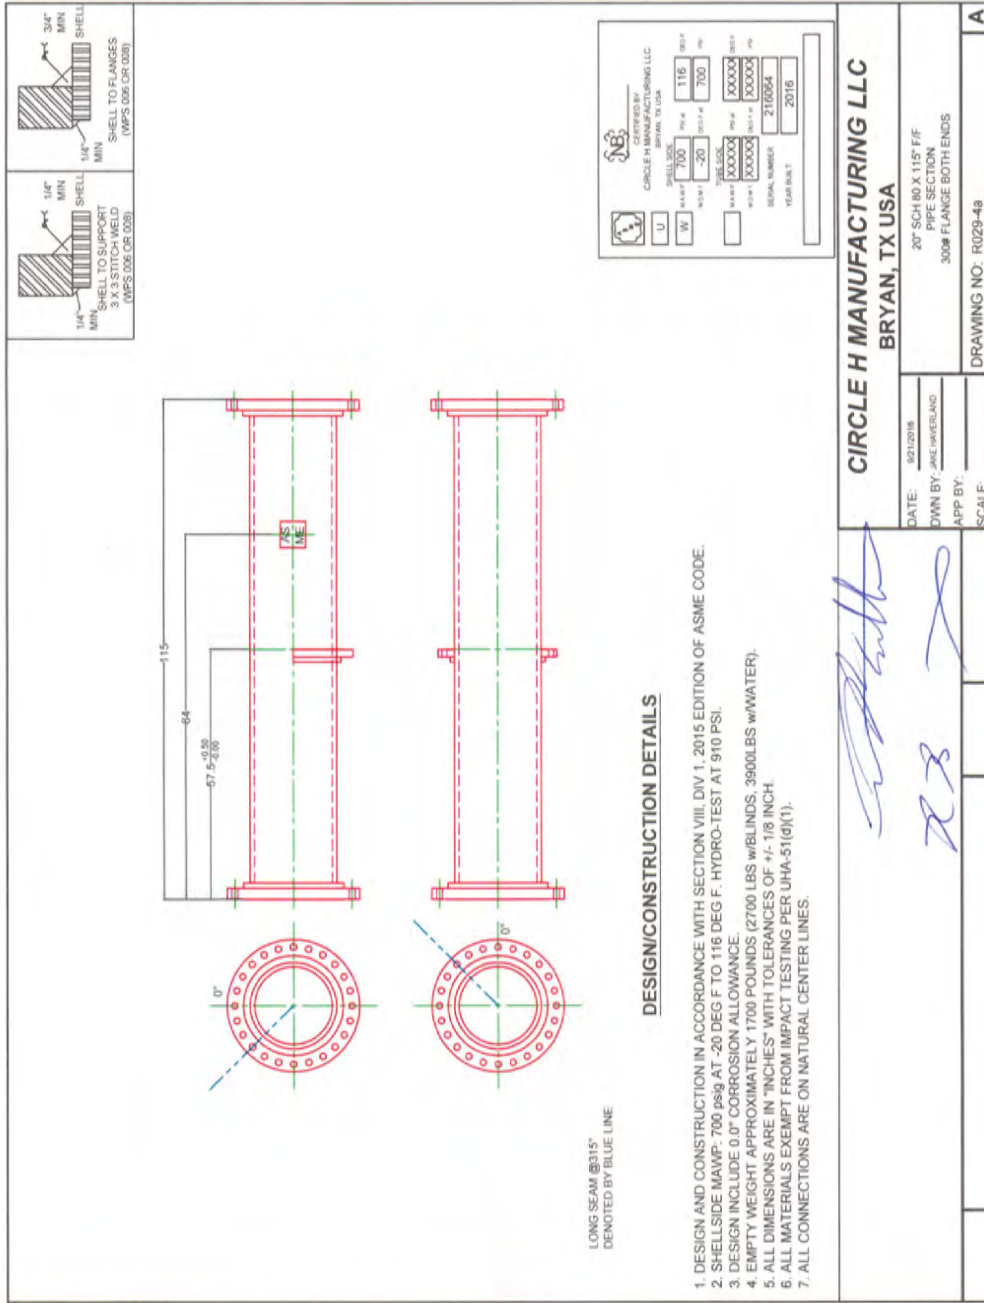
CIRCLE H MANUFACTURING DRAWING OF THE DRIVEN AS CERTIFIED WITH APPROVAL SIGNATURES OF THE RESPONSIBLE ENGINEERS.
